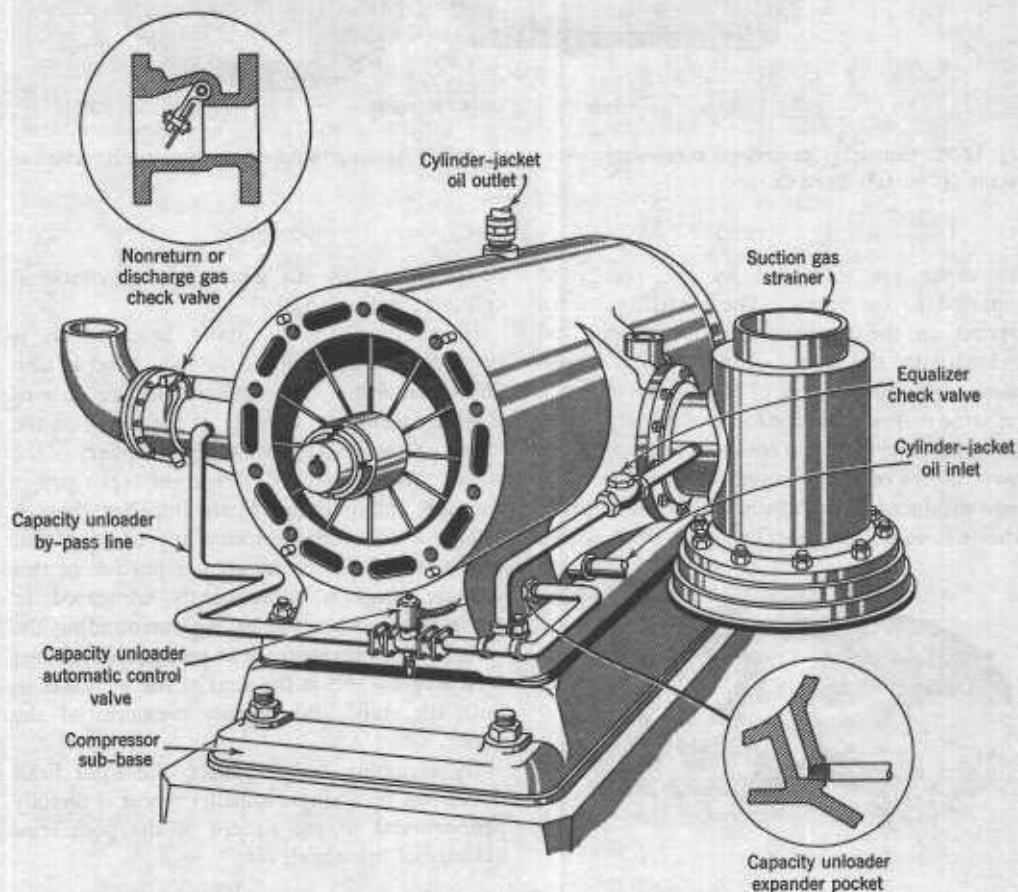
Large capacity, rotating vane-type rotary compressor. (Courtesy Freezing Equipment Sales, Inc.)
